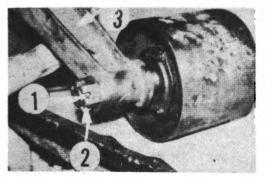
REMOVING ARM FROM IDLER ASSEMBLY
